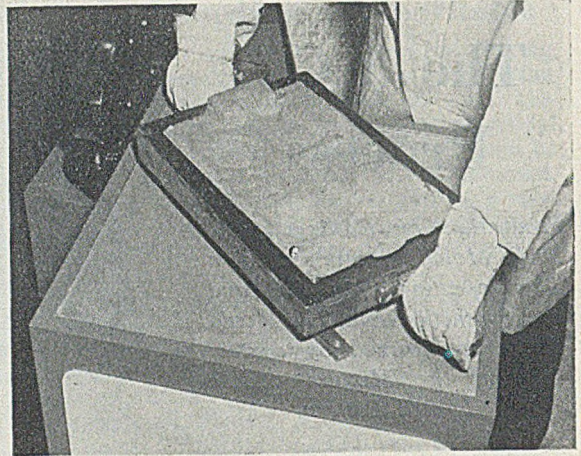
After Curing, the Mould is Removed from the Pattern by Means of Knock-out Pins.
